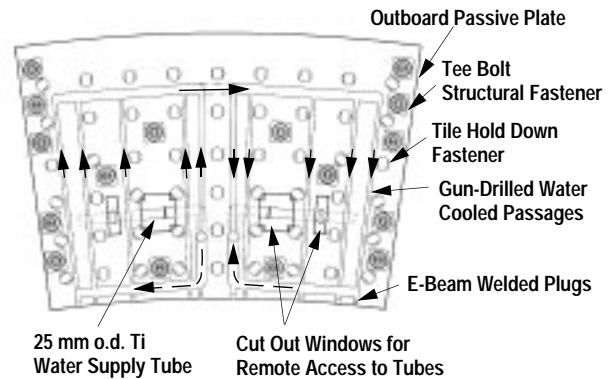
Outboard passive plate flat pattern showing cooling channel routing and fastener locations.
